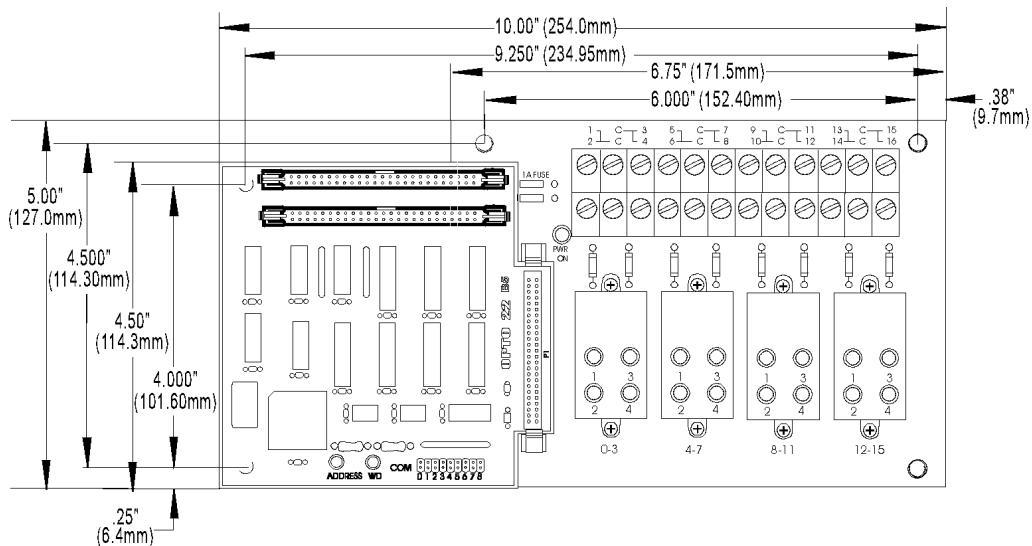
Mounting Dimensions of the PB16HQ with a B5 Installed
